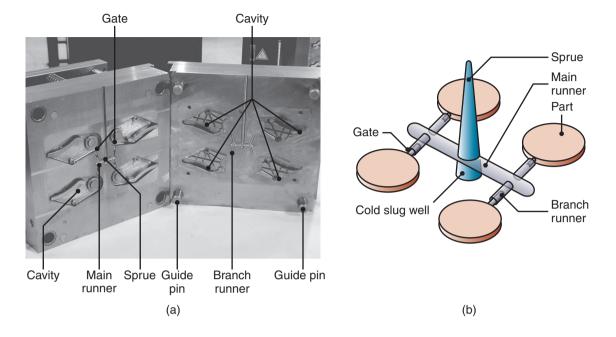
Illustration of mold features for injection molding. (a) Two-plate mold with important features identified. (b) Schematic illustration of the features in a mold. *Source:* Courtesy of Tooling Molds West, Inc.
